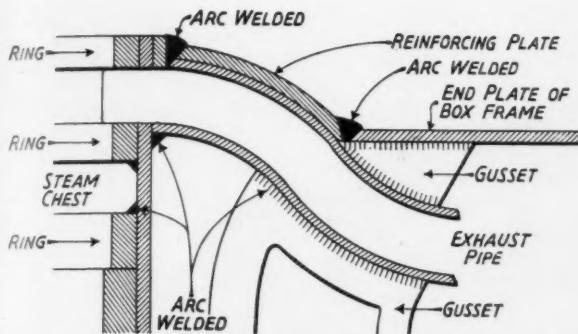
Reinforced and gusseted connection between end of cylinder boxing and steamchest
